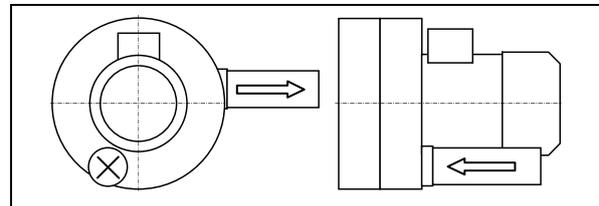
2BH1310 ... 2BH1610, 2BH1910 (two-impeller pump-motor units with a two-stage design)
